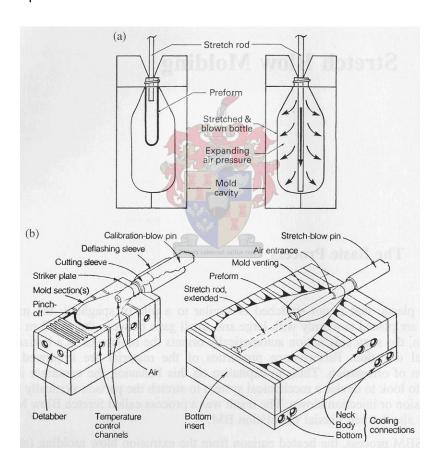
Stretch blow moulding using an injection moulded preform [1].
